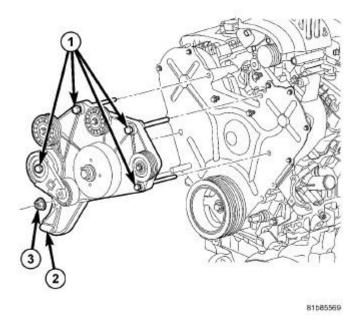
Accessory Drive Bracket & Fasteners Courtesy of CHRYSLER LLC
